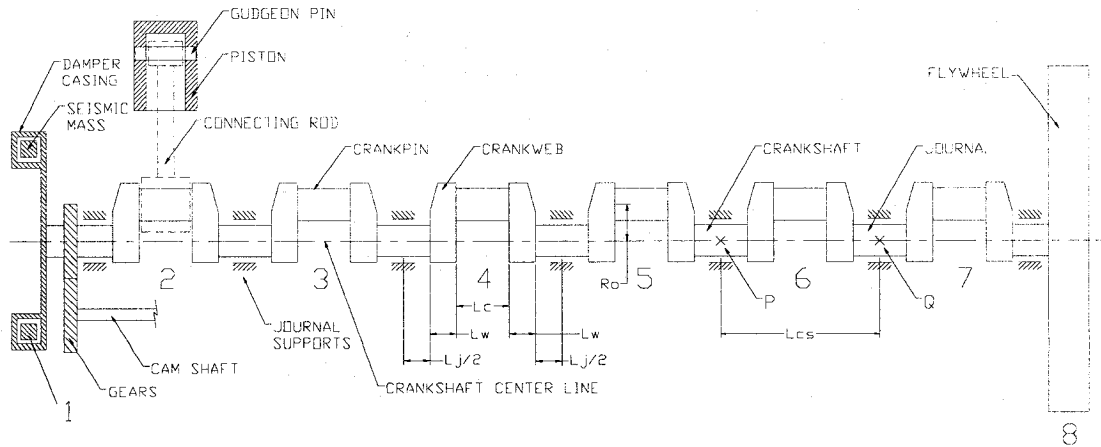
Engine crank throw showing parts for torsional vibrations study
